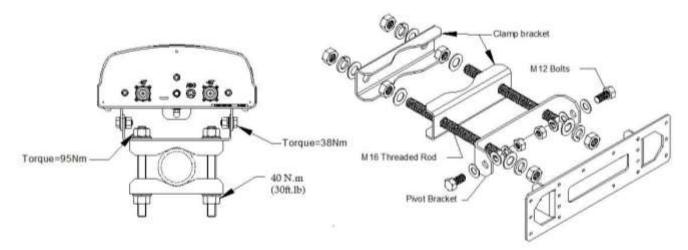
Fixed Downtilt Mounting Bracket Assembled to Antenna
